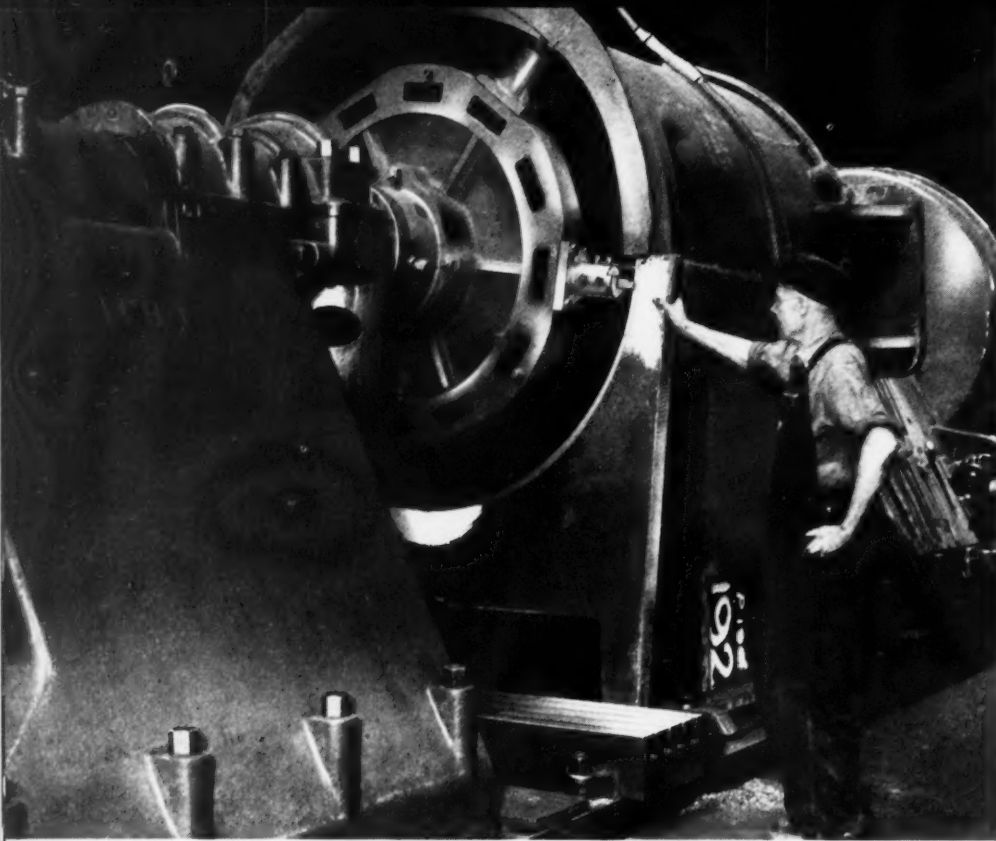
Employing a Draw-cut Shaper for Milling the Valve Face of a Low-pressure Cylinder Casting
